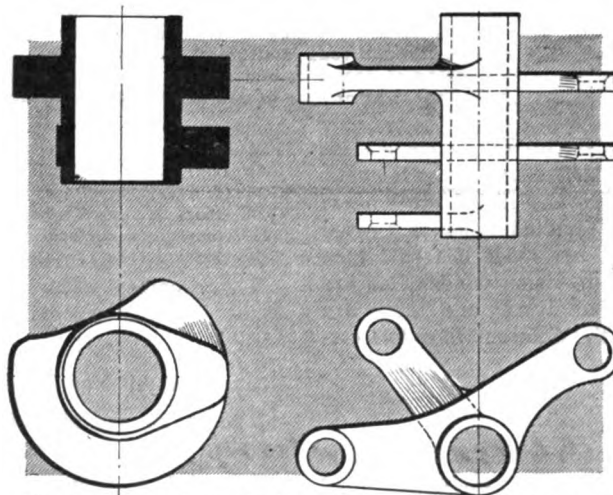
Detail of the double cam and rocker for actuating the Schneider valves
